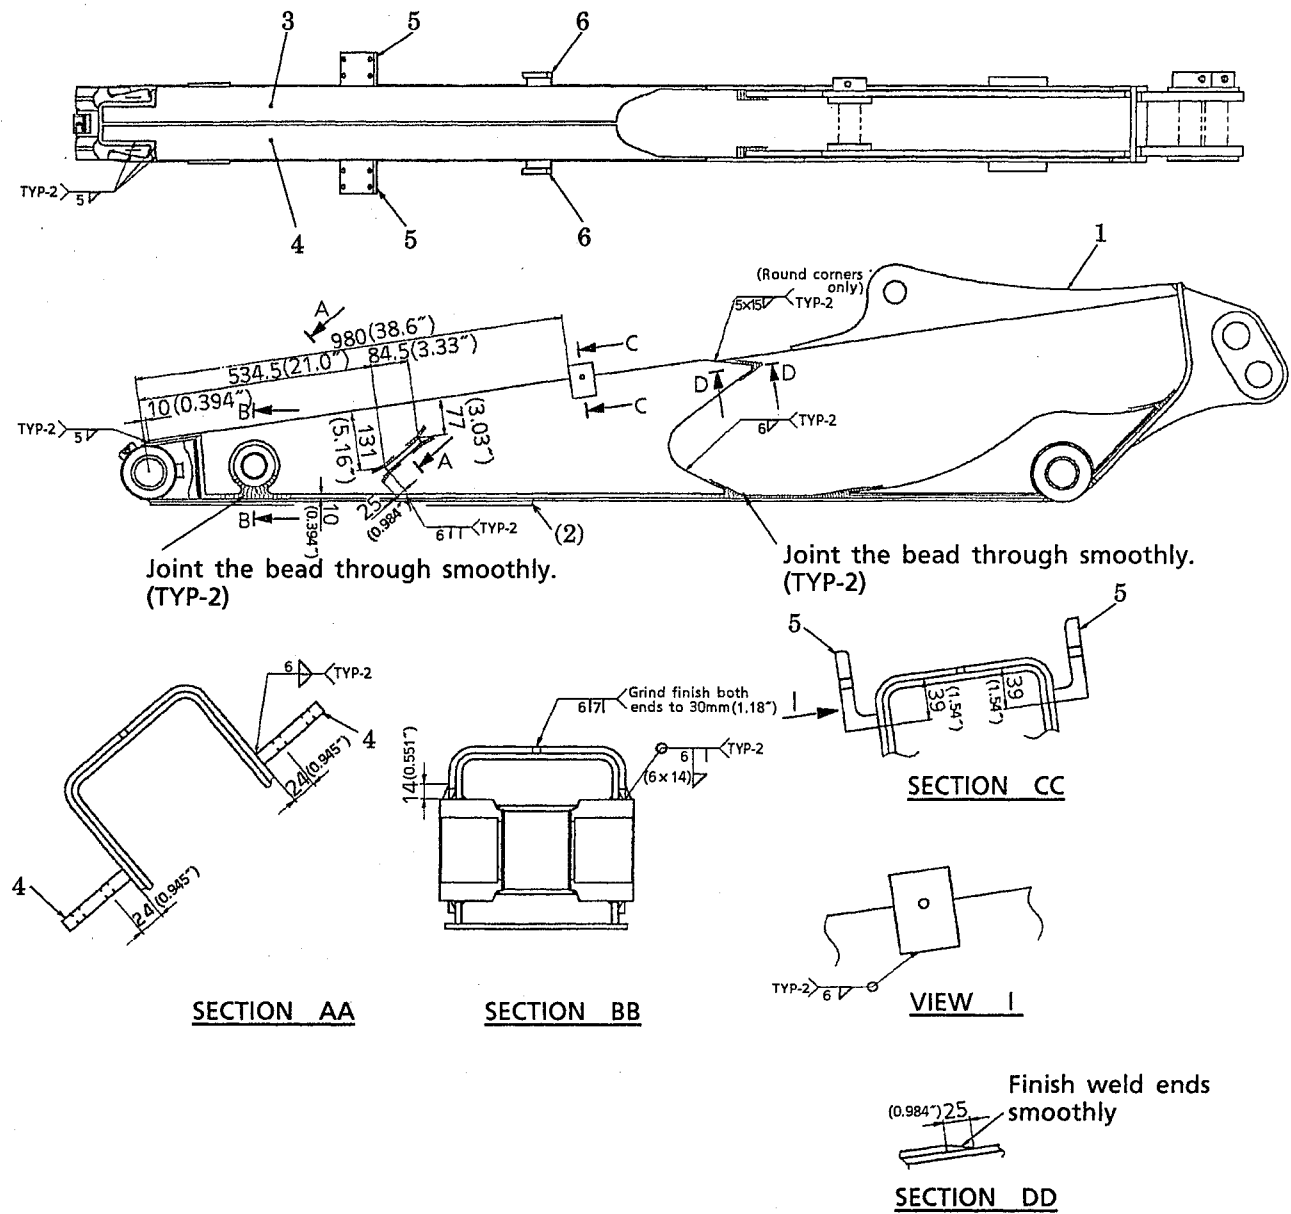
Modification of the 2.07m (6ft-9in) long arm (Nibbler & Breaker)
